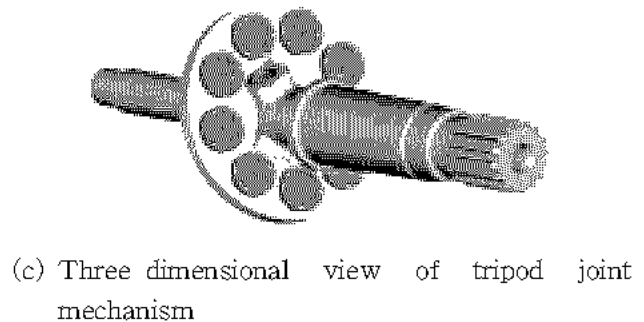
Composition of the swash plate type piston motor with tripod joints
